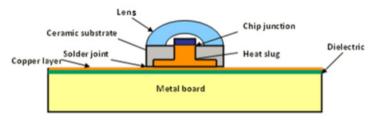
LED Chip Package Mounted on a Metal Core PCB as Suggested by Cree [1]
